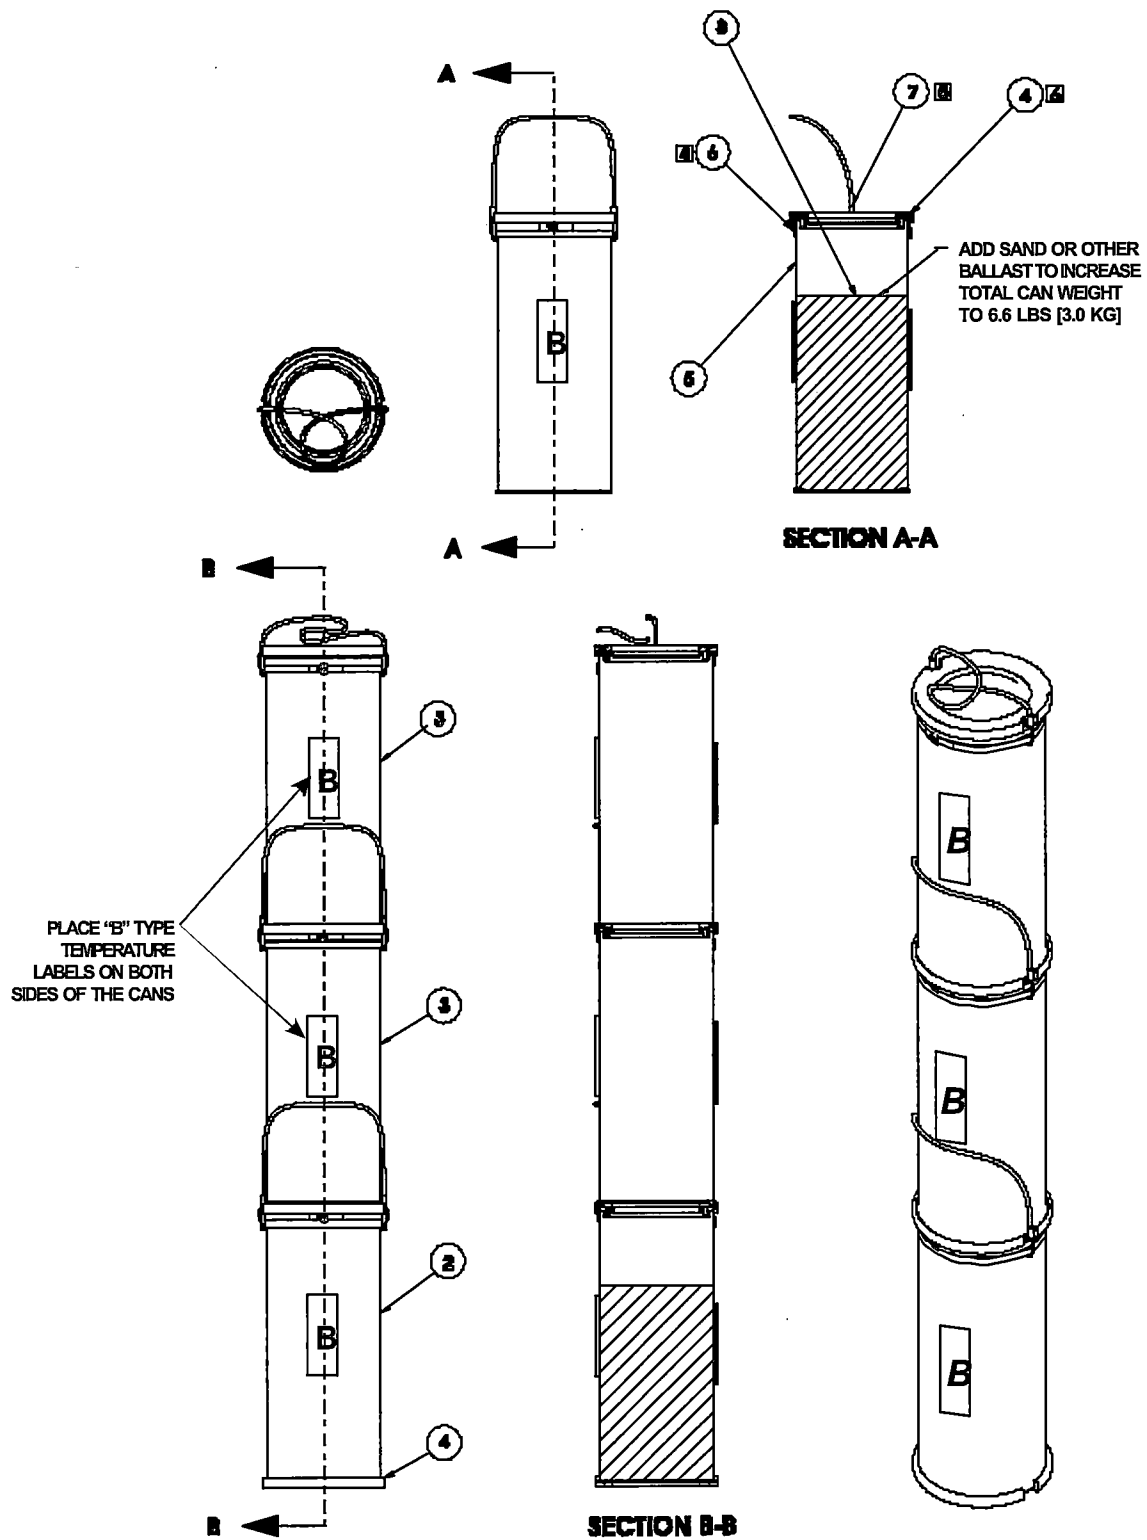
Light-weight test assembly temperature-indicating label locations
